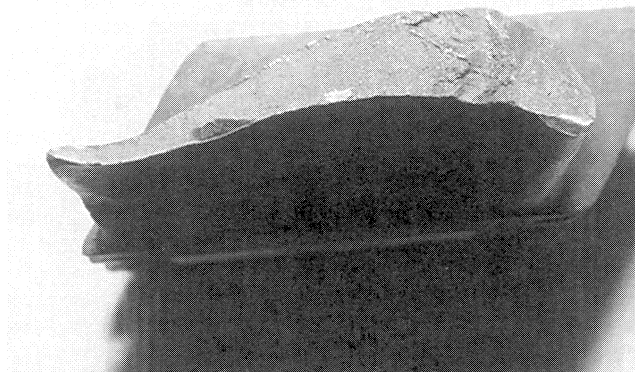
Fracture Surface of Sixth Stage Blade Showing Fatigue.
